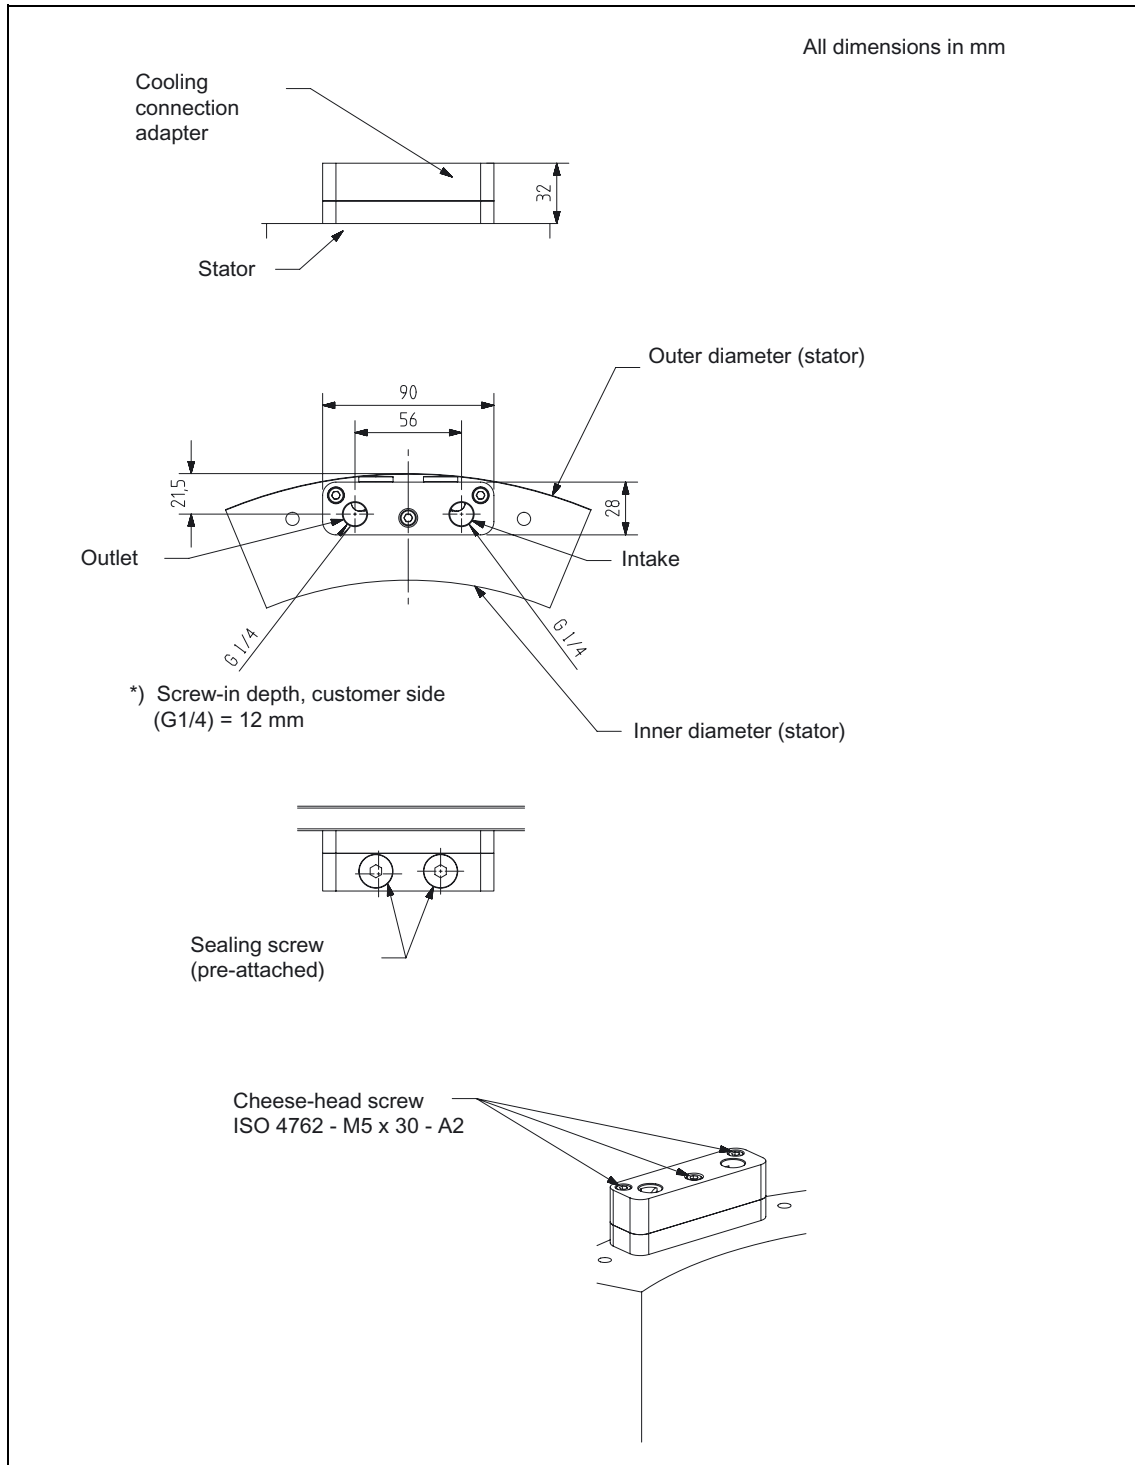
Axial cooler connection for 1FW6160, 1FW6190 and 1FW6230
